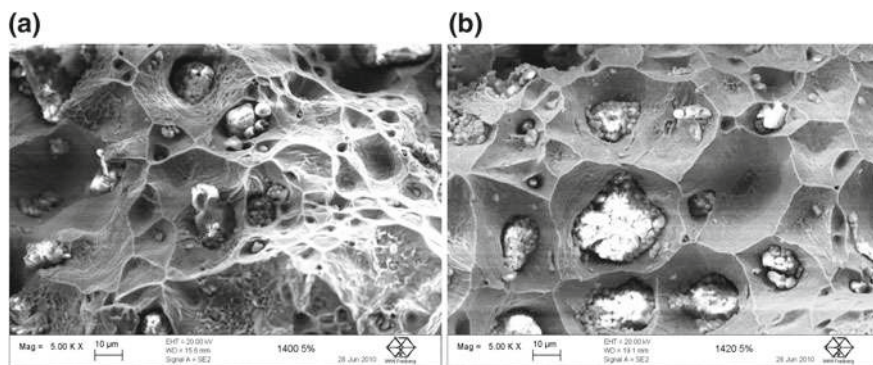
The fracture surfaces for a composite material with 5% ZrO_2 sintered under vacuum for 2 h at sintering temperatures of 1400 °C (a) and 1420 °C (b)
